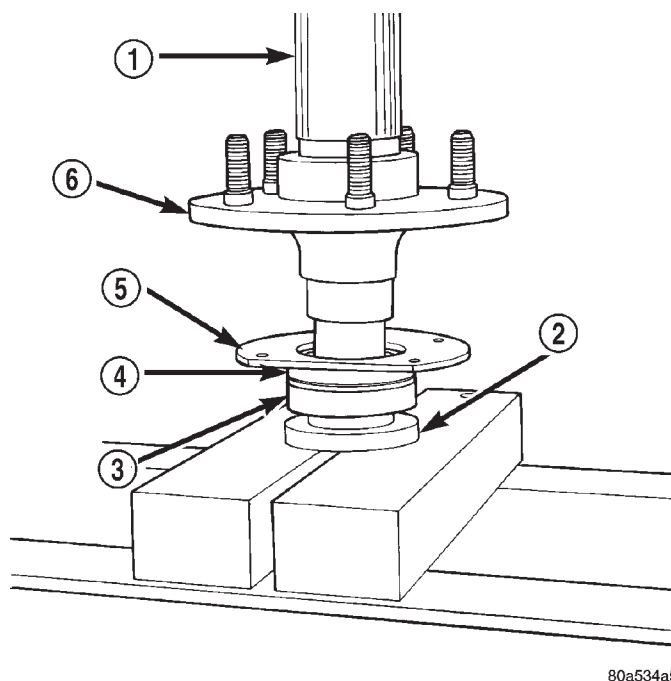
AXLE BEARING AND SEAL COMPONENTS
